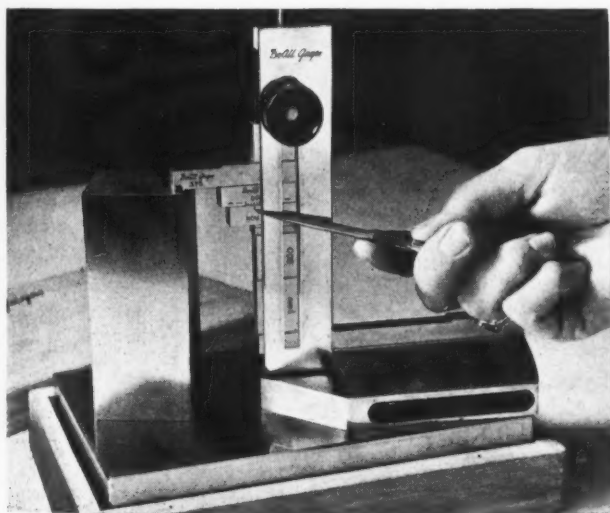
Height Gage for Measuring to 0.00001 Inch, which Comprises Precision Gage-blocks, Holder, Master Flats, and DoAll Vernier Gage
